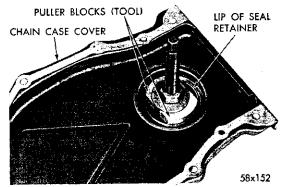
Removing Timing Chain Case Cover Oil Seal Using Tool C-3506
